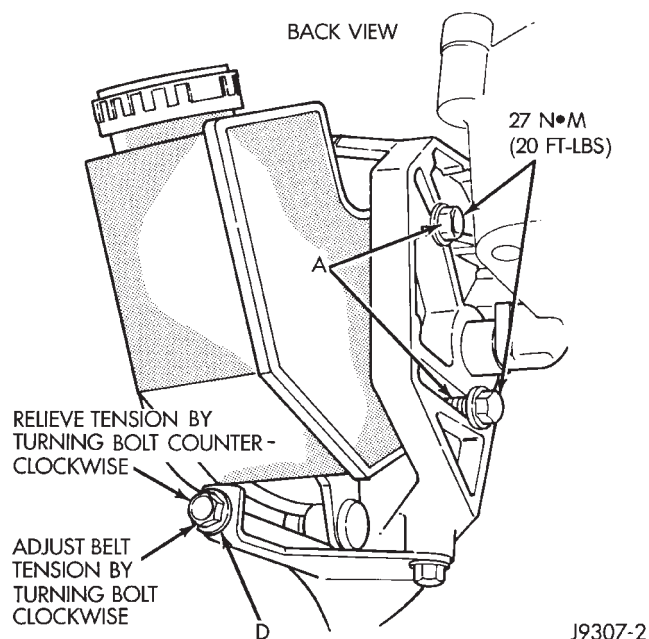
P.S. Pump Rear Mounting Bolts—4.0L Engine
